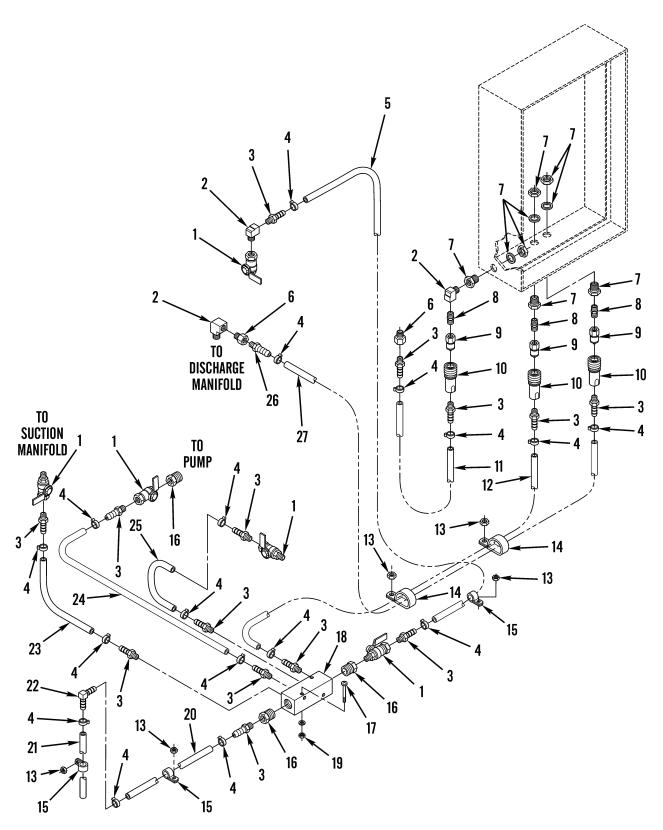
Pump Lines and Fittings (Sheet 1 of 3)
